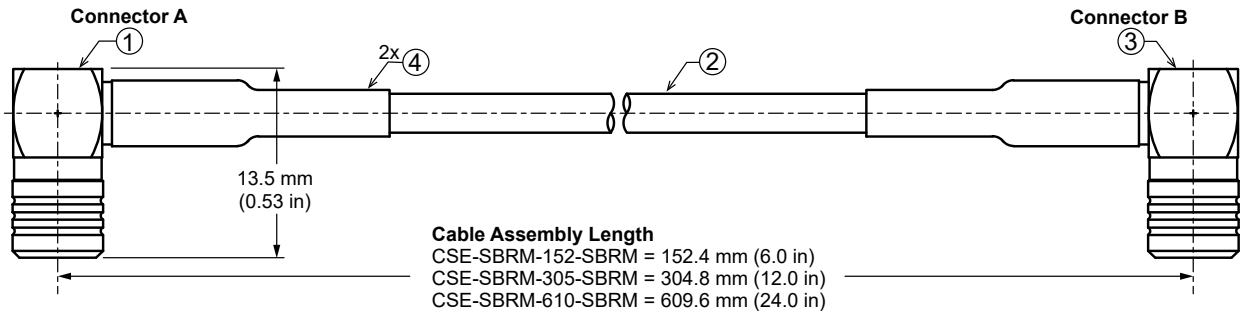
Product Dimensions for the CSE-SBRM-ccc-SBRM Cable Assembly
